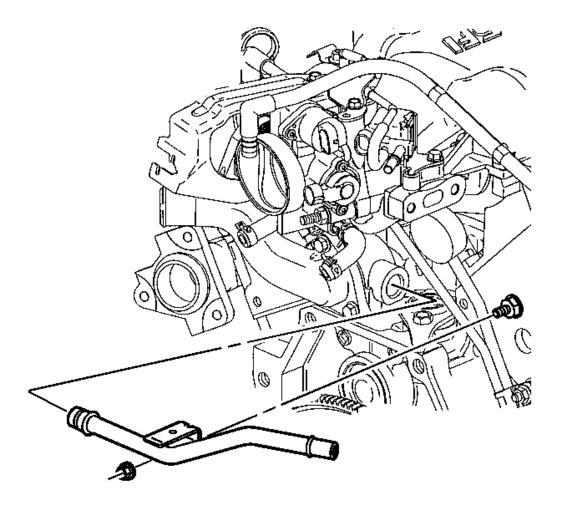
View Of Heater Inlet Pipe & Nut Courtesy of GENERAL MOTORS CORP.
